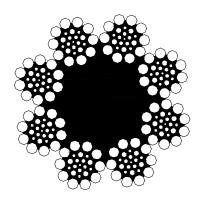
Type I, general purpose, class 4, construction 5, 8 by 19 (Warrington-Seale) and type II, elevator, class 2, construction 5, 8 by 19 (Warrington-Seale).
